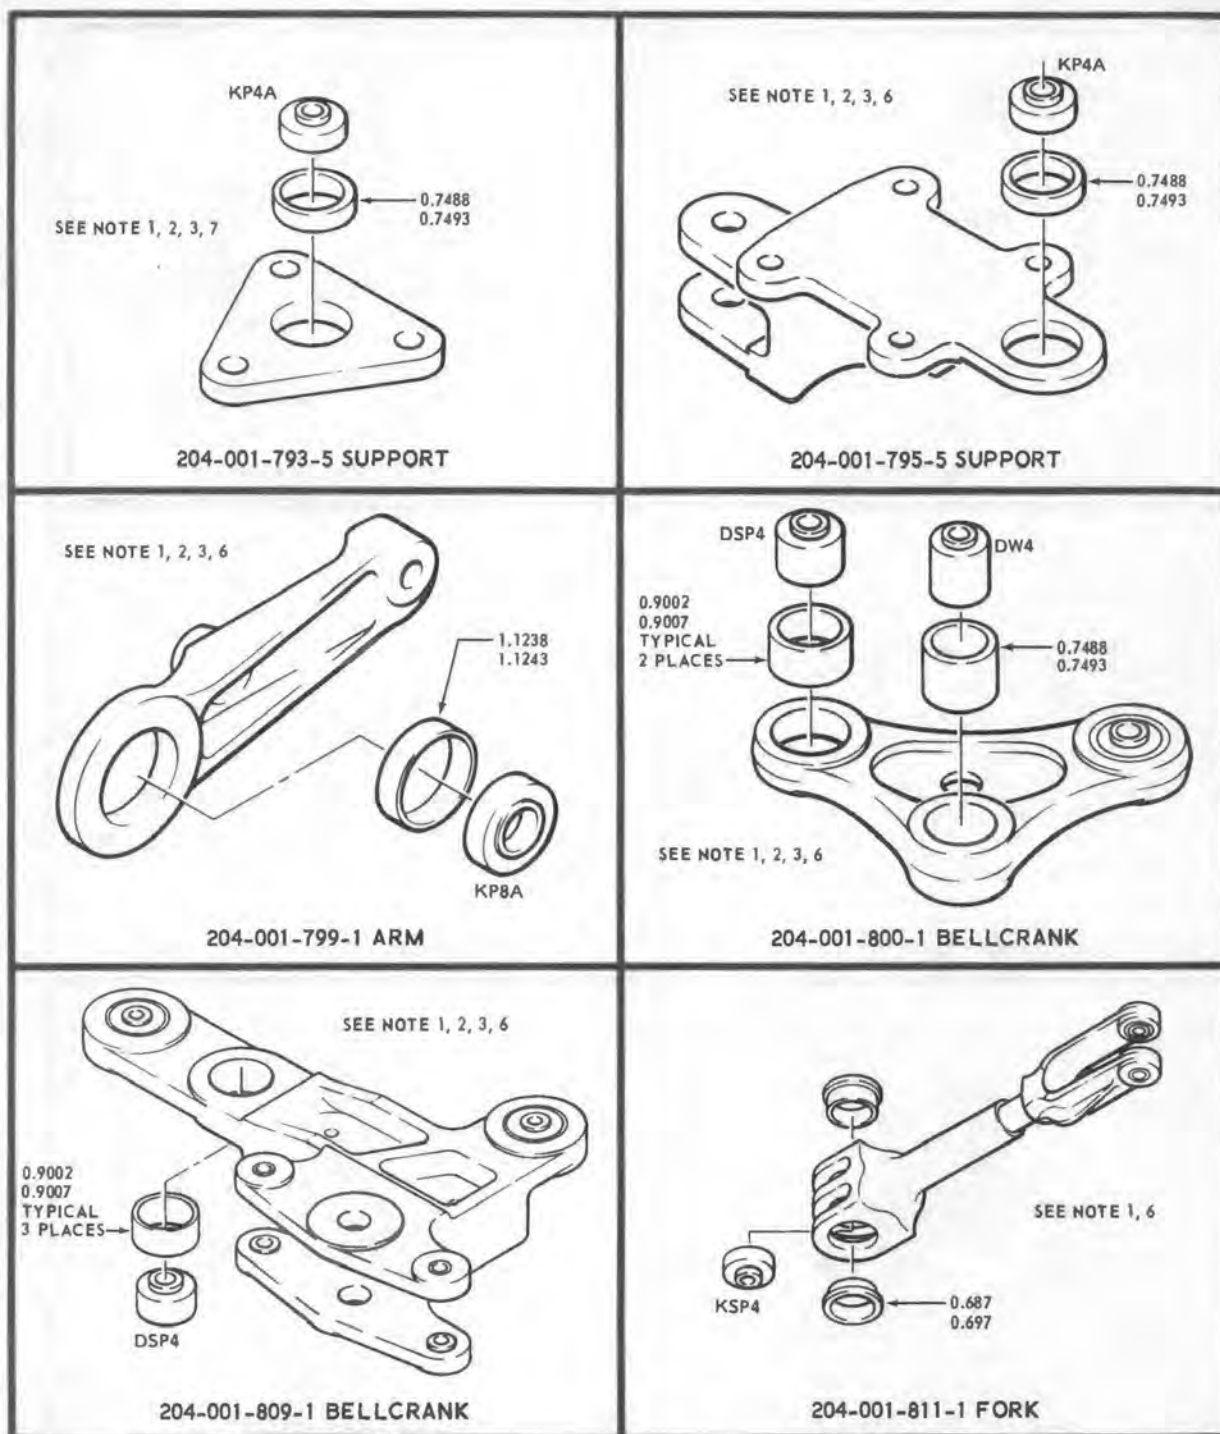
Bearing replacement (Sheet 2 of 7)
